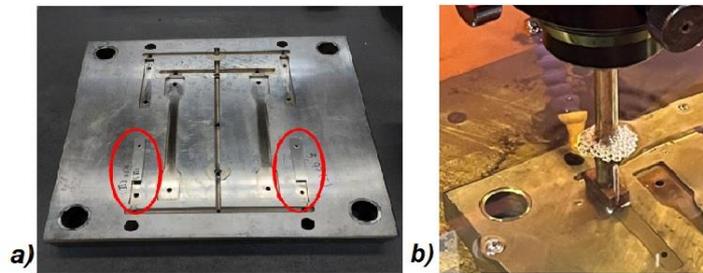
Injection mold adaptations: a) Installation of produced plates; b) Electro erosion of the compression CDP cavity.
